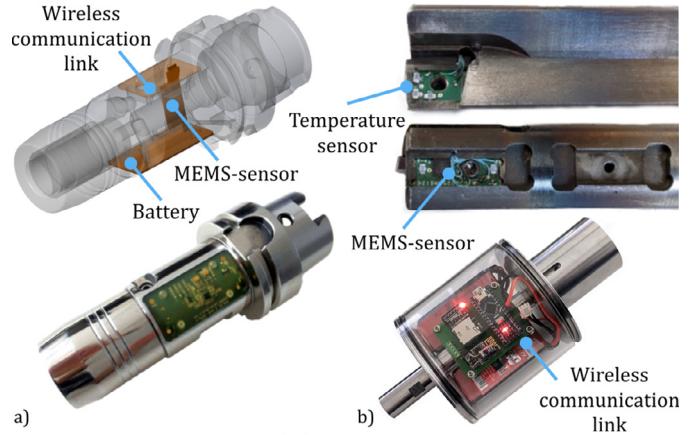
MEMS-sensors integrated in tool holders, a) sensory tool holder, b) sensor-integrated deep hole drilling tool.
